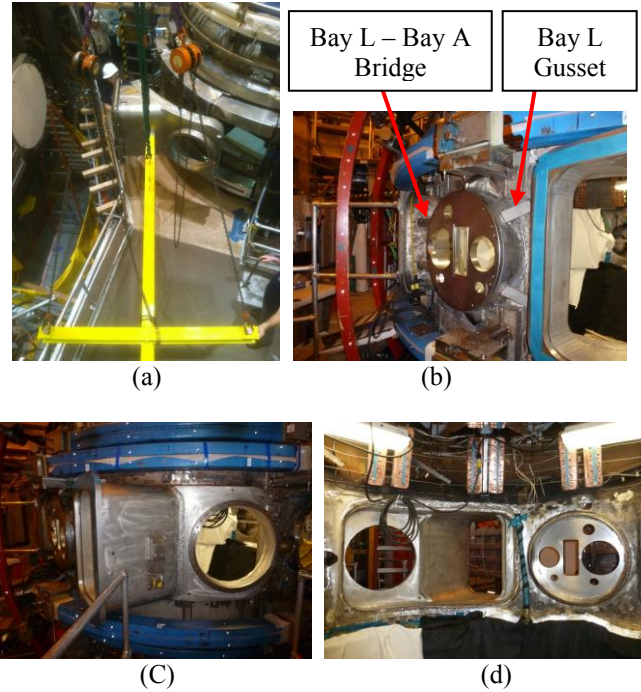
The actual look of the new Bay J-K and Bay L ports as part of the NSTX-U Vacuum Vessel: (a) The installation of the new J-K Port Cap; (b) The outside look of the installed Bay L Port and Exterior Reinforcements; (c) The outside look of the Bay J-K Port Cap; (d) The inside look of the Bay J-K and Bay L ports before the installation of the internal reinforcements.
